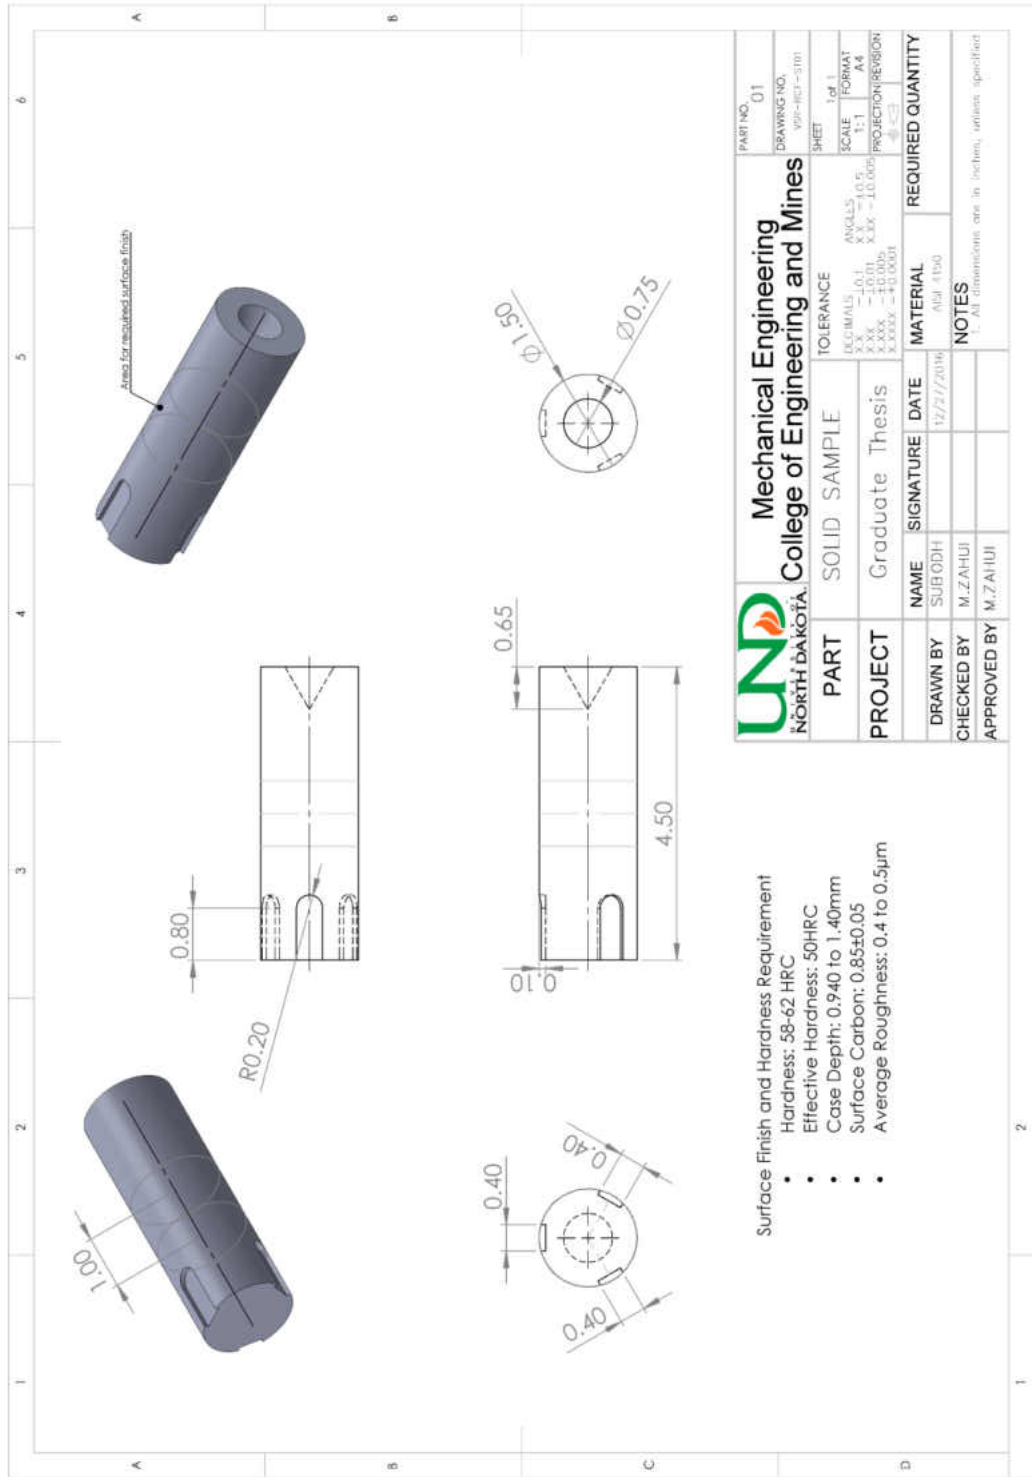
Manufacturing Drawing for RCF Testing of Solid Specimen.
